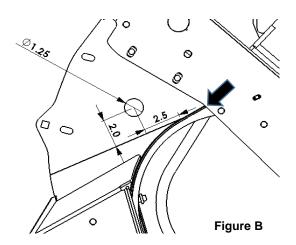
Mount the Hay Indicator as shown on the side of the sheet metal (Option 1 Mounting Style). Mark two holes per side to mount the bracket and one hole for the sensor. The sensor hole will be 1-1/4" in diameter; the bracket holes will be 5/16".
